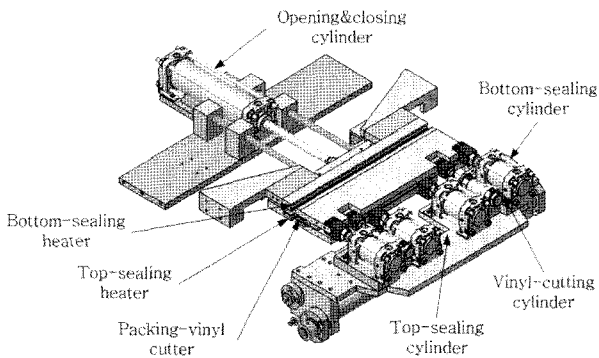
Composition and CAD model of sealing and cutting mechanism
